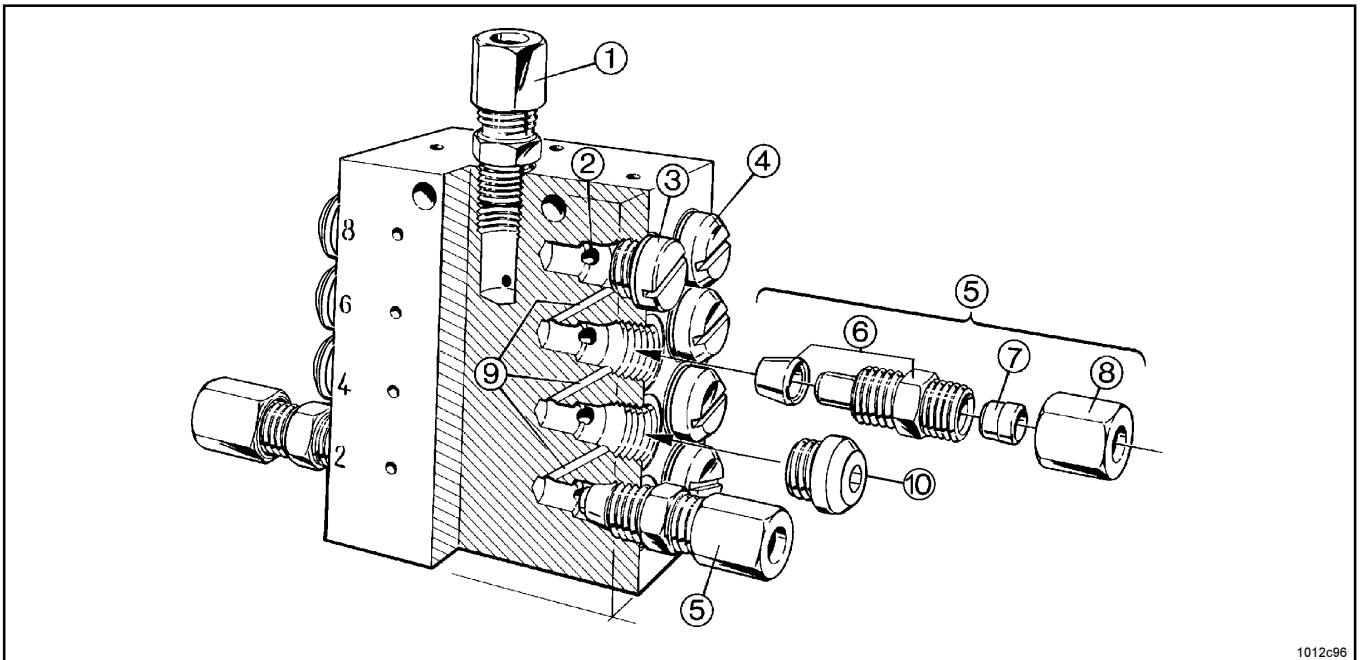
Install the outlet fittings and closure plugs in accordance with the dosage
